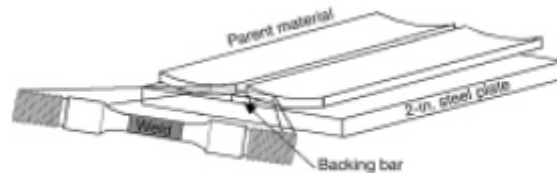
Schematic of setup for welding of plates to simulate girth welds.
